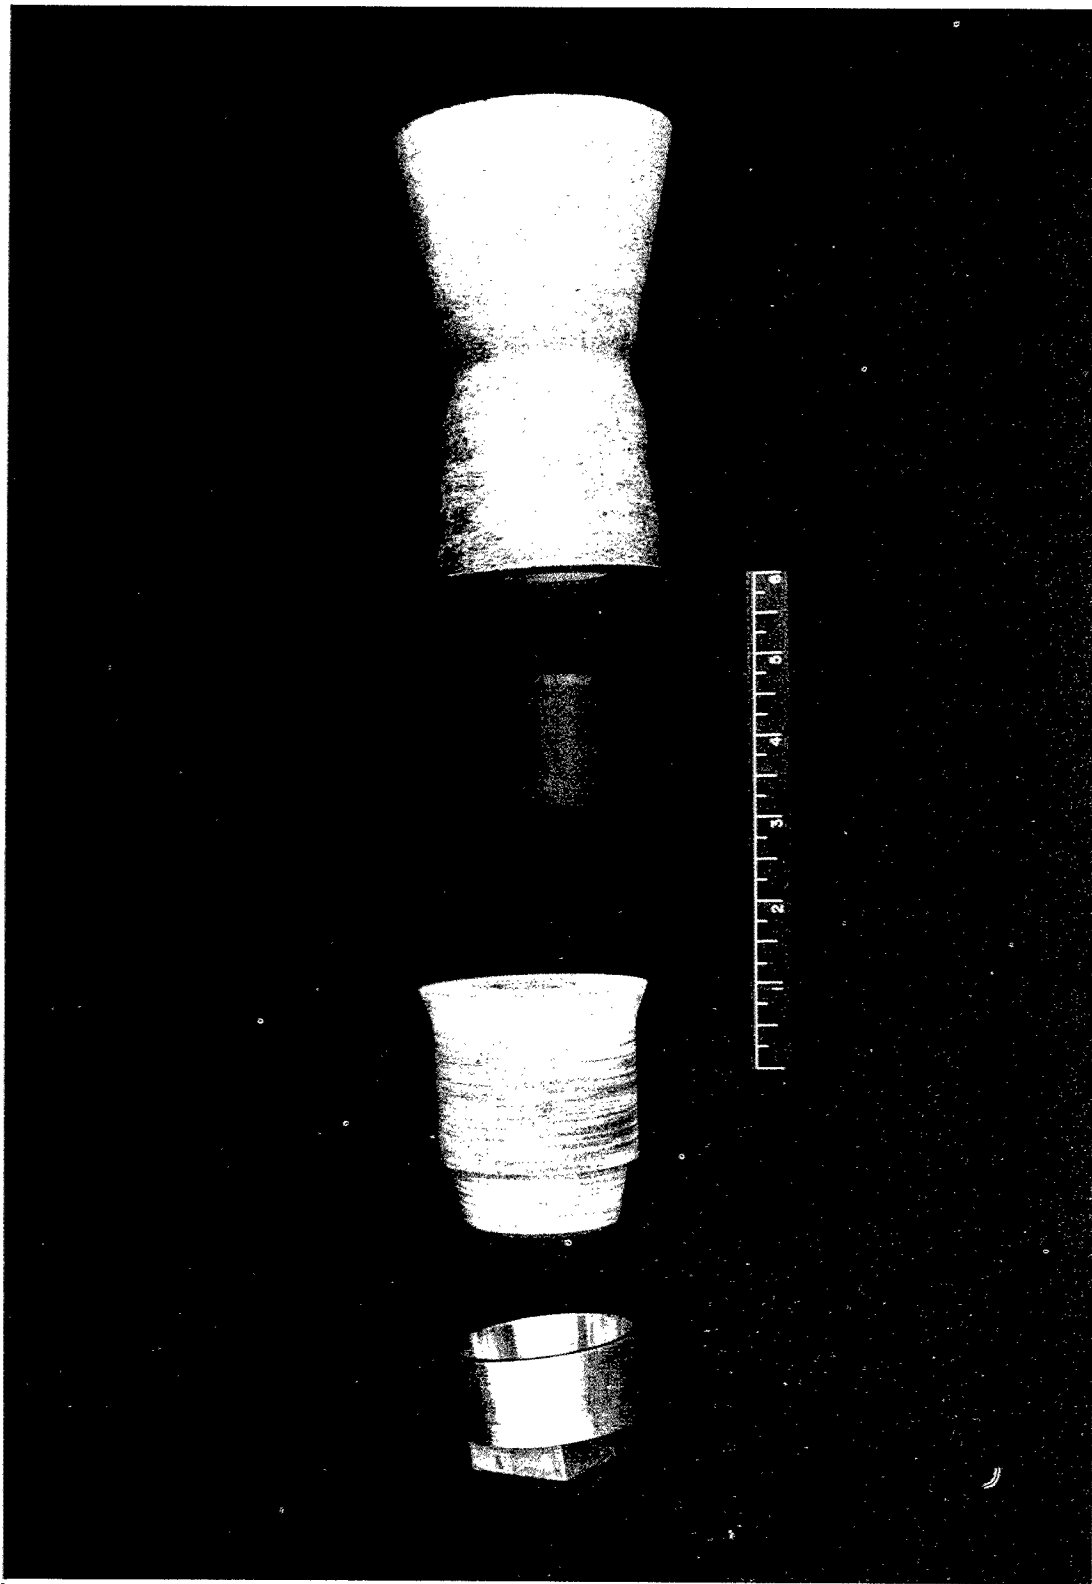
Exploded View of Uncooled Rocket Motor for Space Altitude Control
